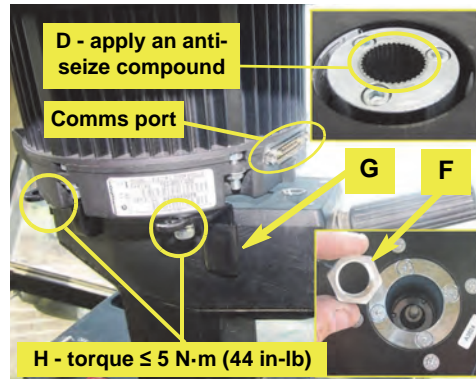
with insets: Steering wheel and anti-rotation bracket installation
